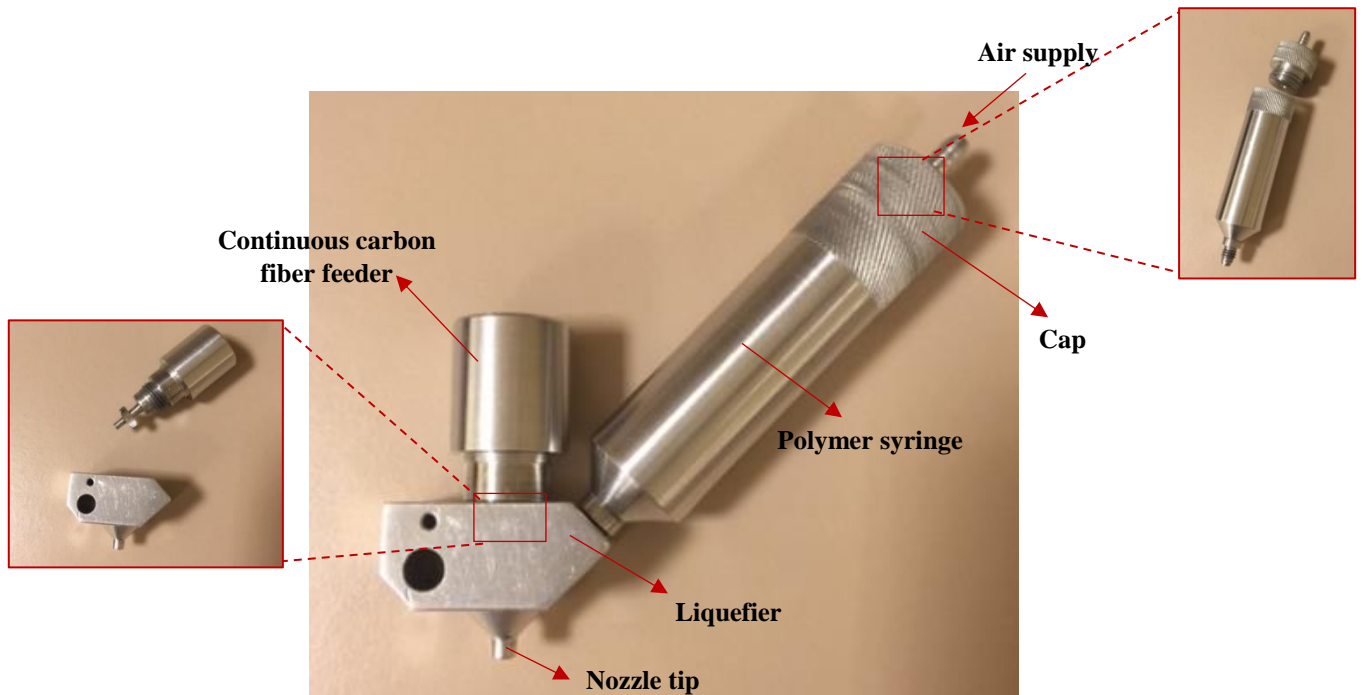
The initial design of the coaxial nozzle with 3 components and cap, fully assembled view.
